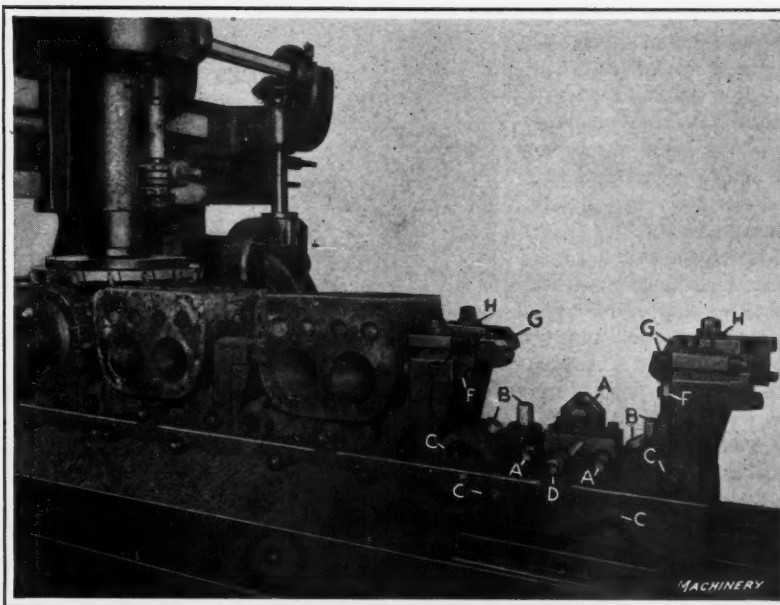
Opposite Side of Multiple-spindle Milling Machine shown in Fig. 11. This Illustration shows Adjusting Screws on the Fixture
